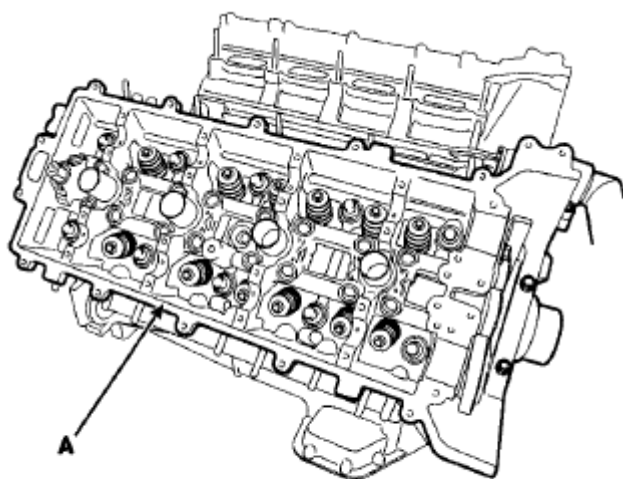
Identifying Hydraulic Lash Adjuster Assembly
